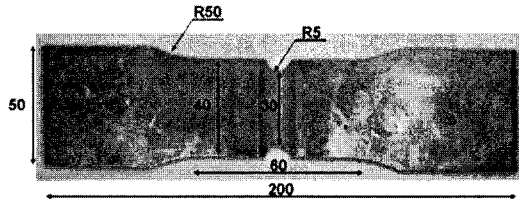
Shape and size of the fatigue test specimens (unit: mm)
